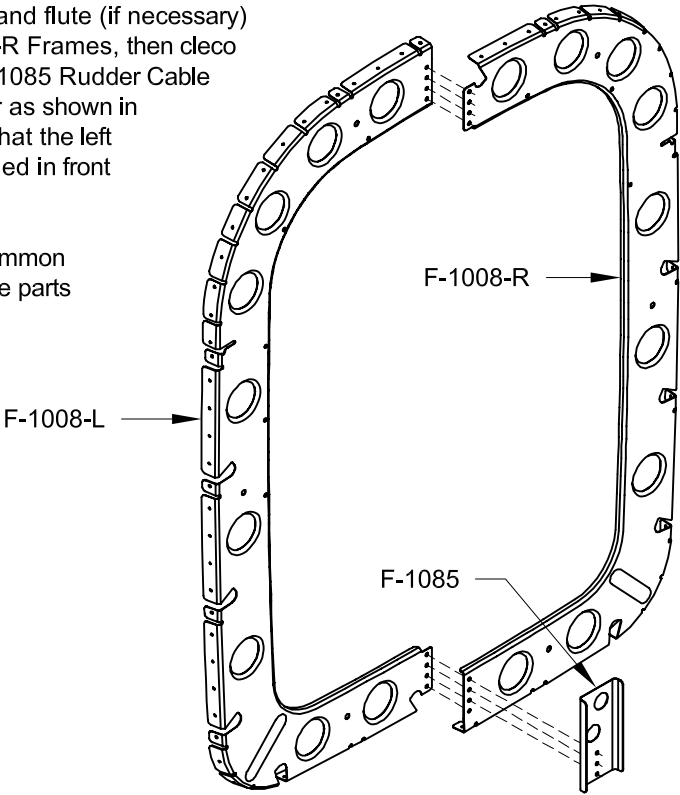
ASSEMBLING THE F-1008 FRAME
